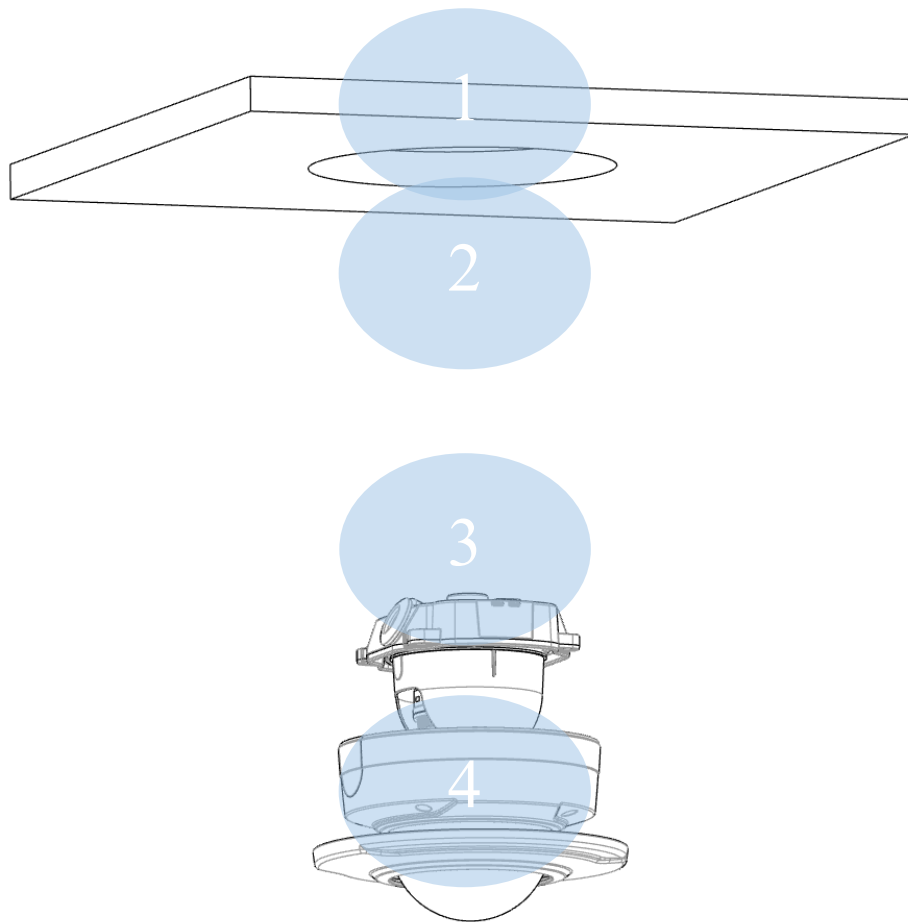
Exploded view of the different parts where the interfaces can be seen.
